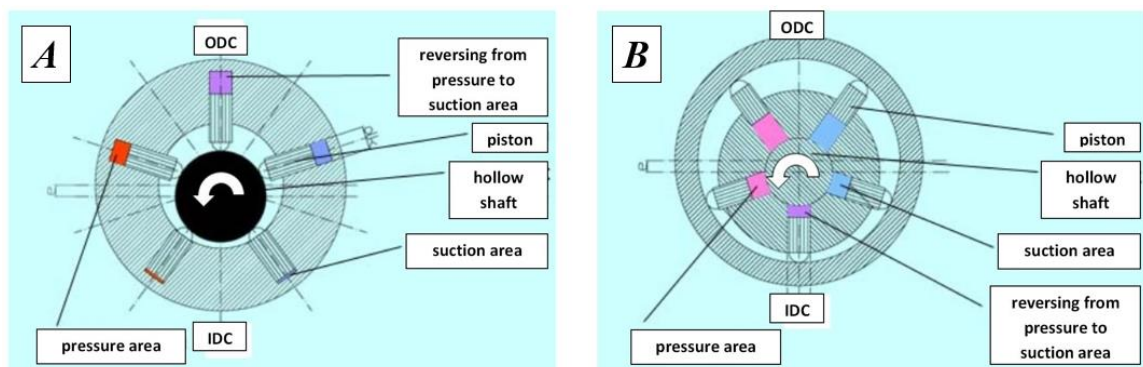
(A) Rotating cam type unit, (B) Rotating cylinder type unit.
